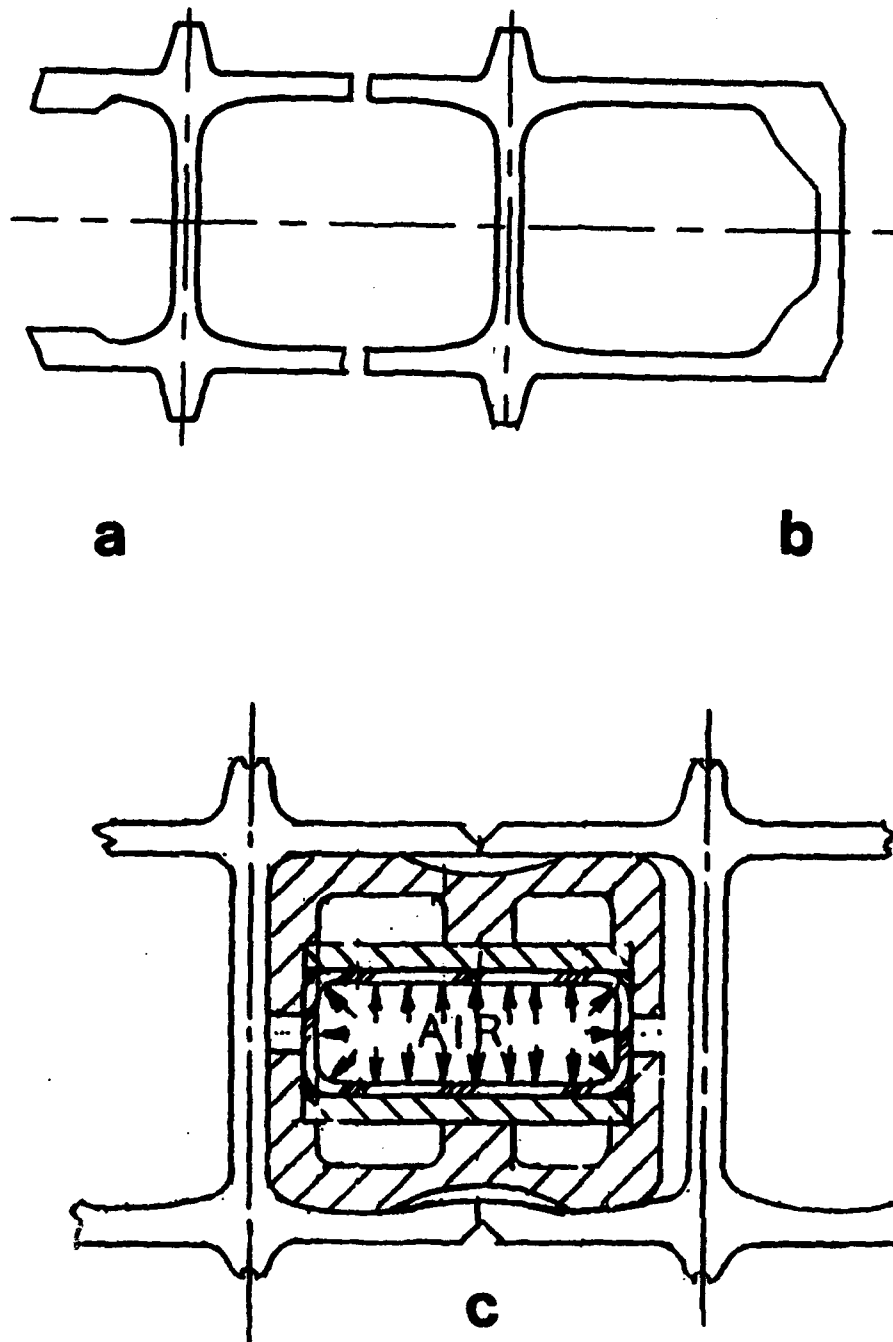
Mating end configurations of extruded AE subpanels: Type I (a), Type II (b); schematic representation of a backing bar for welding Type I joint (c).
